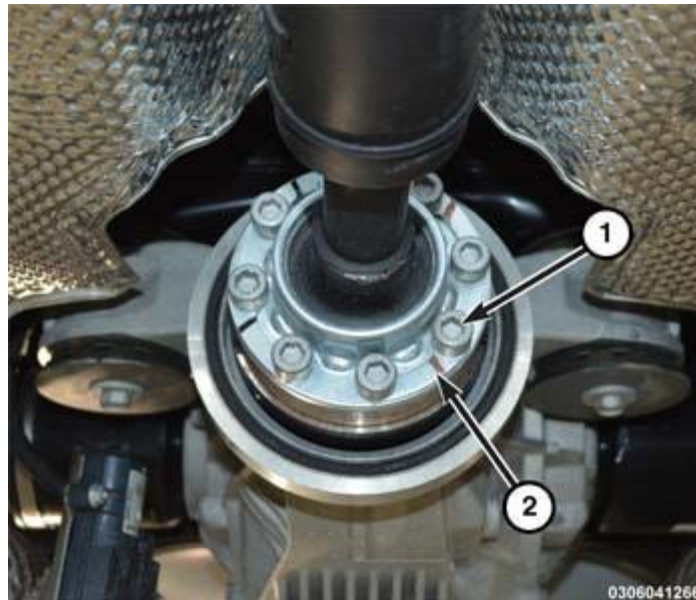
Drive Shaft To Axle Flange Bolts & Washers
